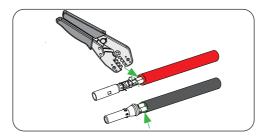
Inserting the PV PIN Contact and Crimping the Terminal
